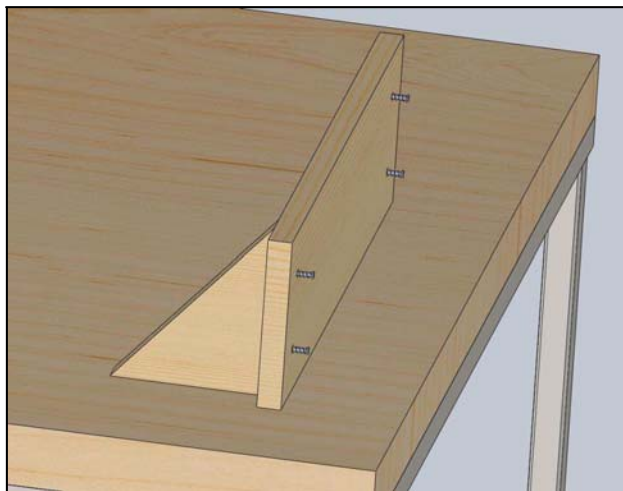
(1) Hold the gussets tight and aligned with line to mark holes.
